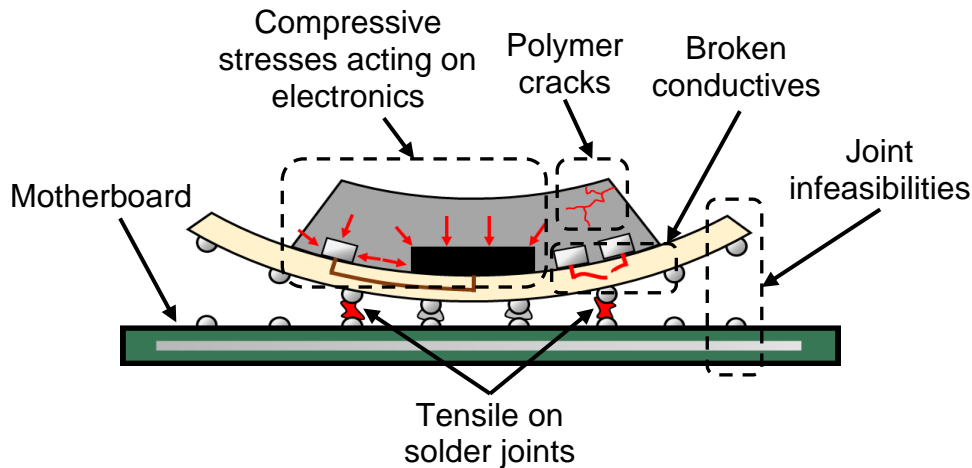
Schematic of warpage driven failures in an IC package
